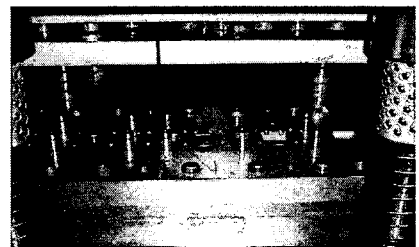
Progressive dies for the manufacturing of the milli-structure deep drawing part
